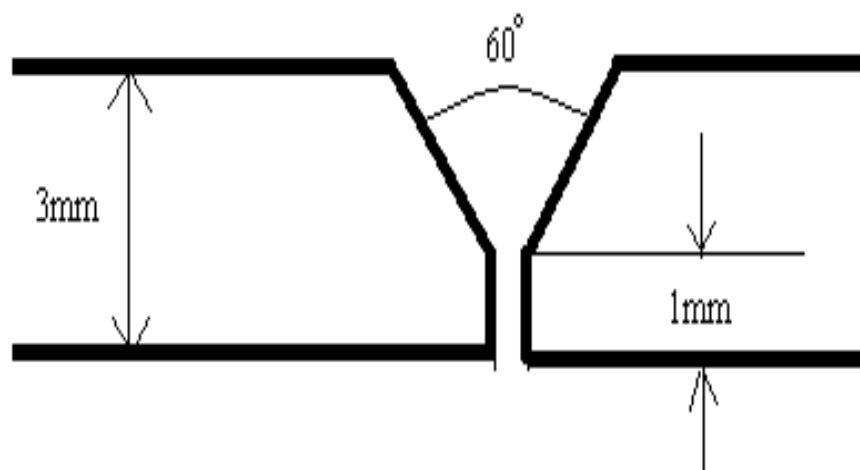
EDGE PREPARATION OF WELD SPECIMENS
